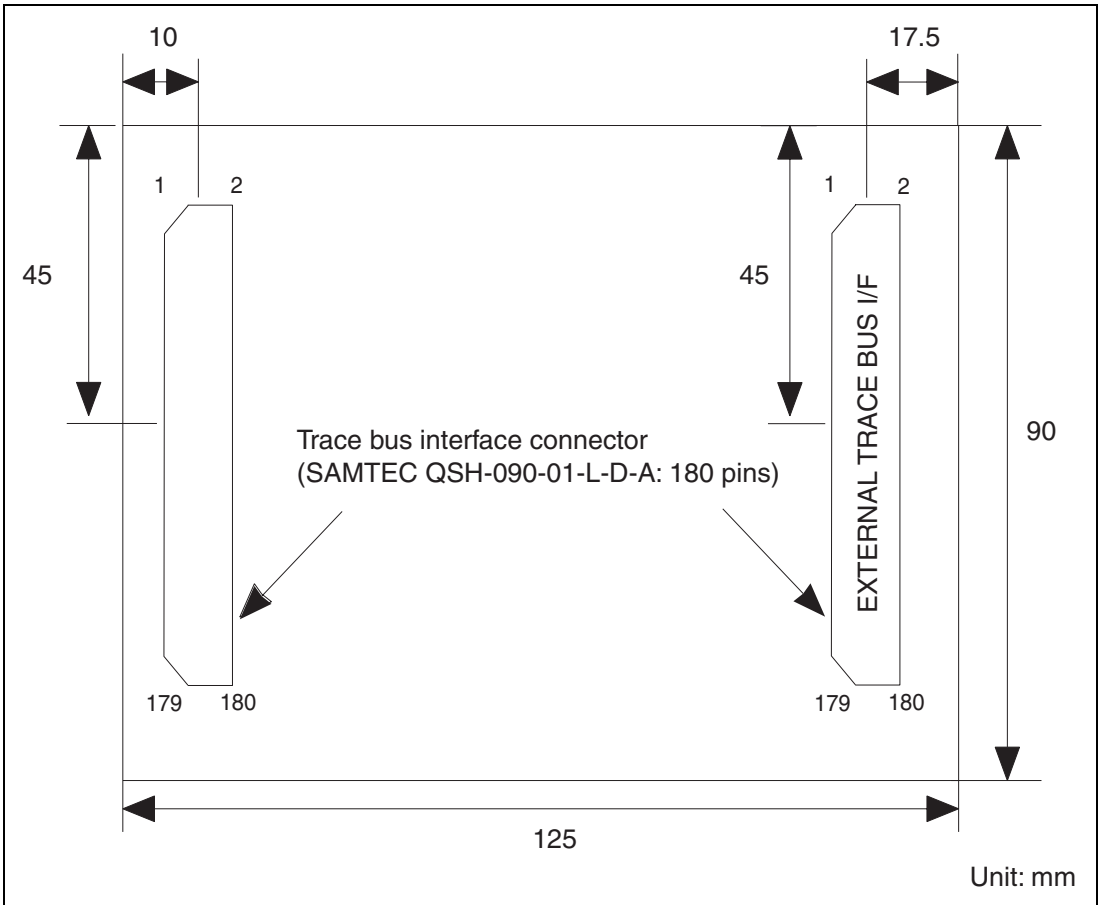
External Dimensions of the External Bus Trace Unit (on which the Connector is Installed)
